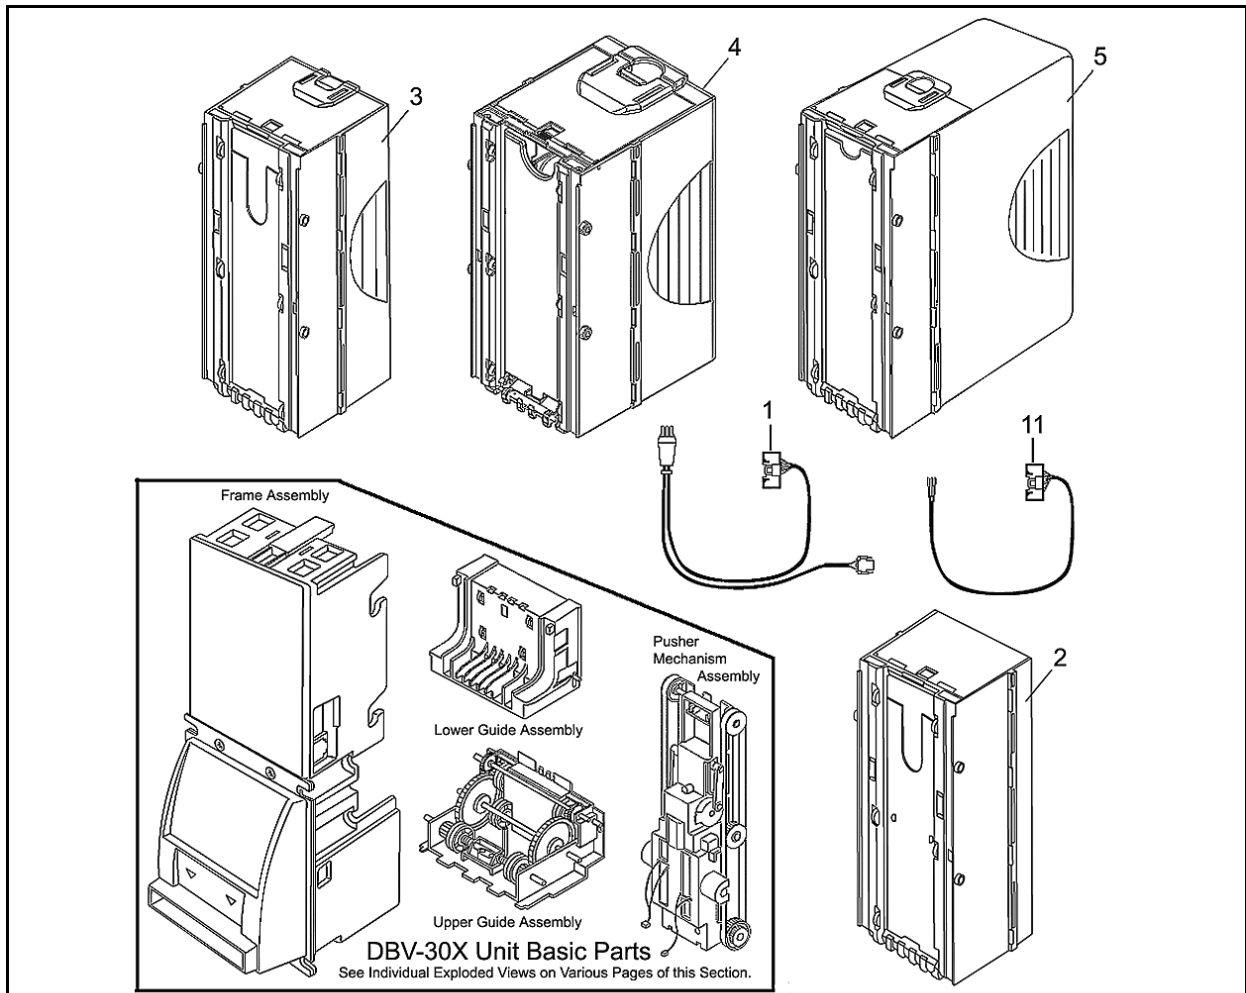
DBV-30X Bill Validator Primary Component Parts Exploded View Diagram (Part 1)
